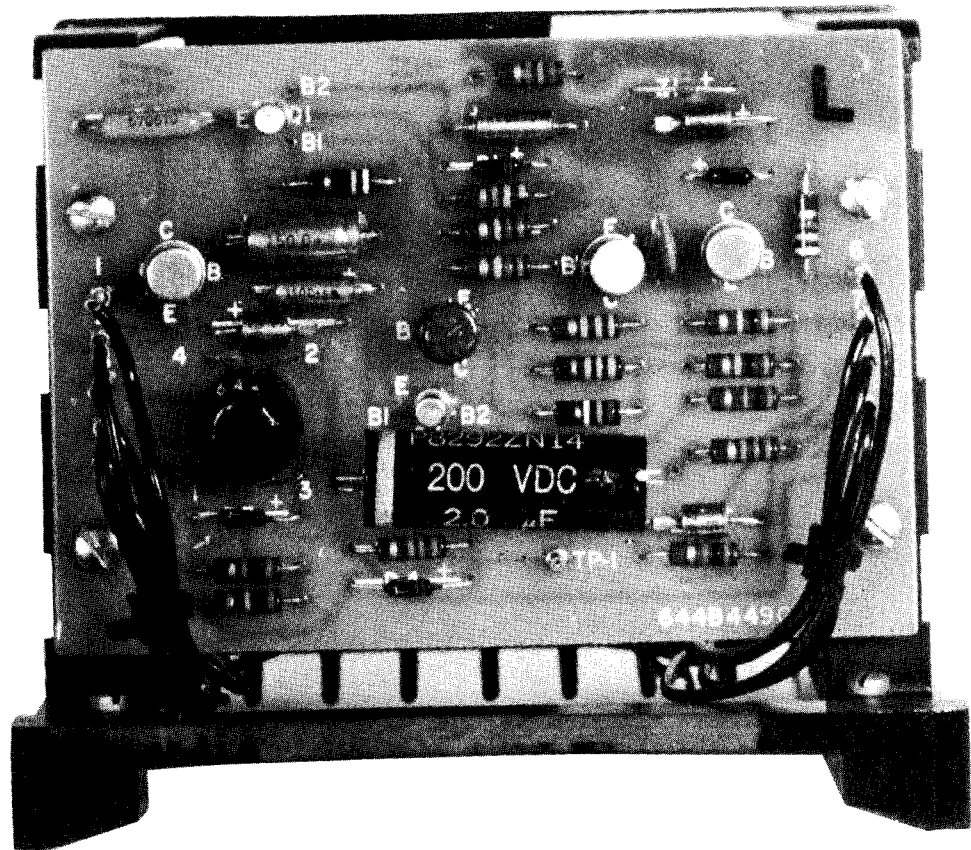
Type SGR-51 Reclosing Relay (Rear View).
